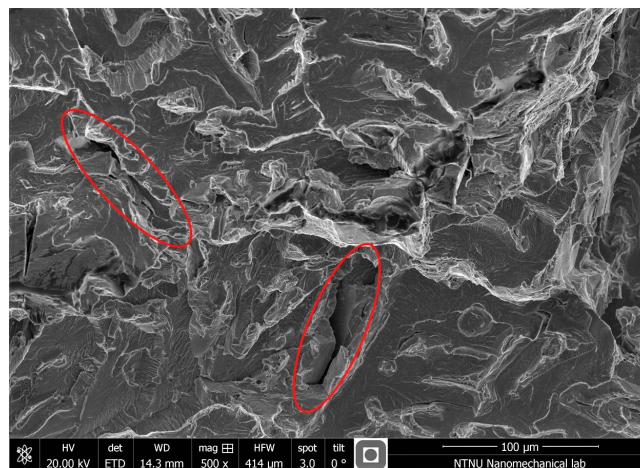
Images showing the fracture surface of the reference specimen for material B.
